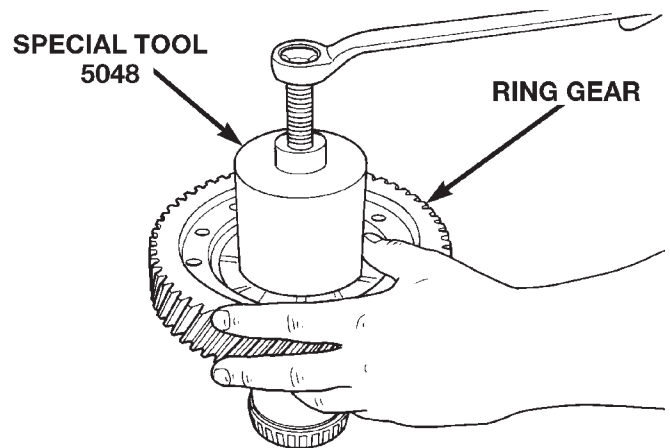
Remove Differential Bearing Cone (Ring Gear Side)
